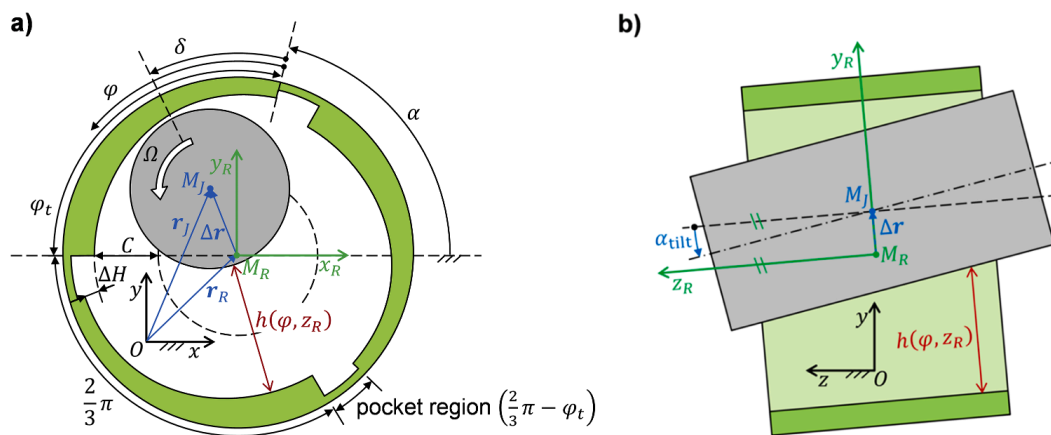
Three-lobe air ring bearing geometry: (a) front view and (b) side view.
